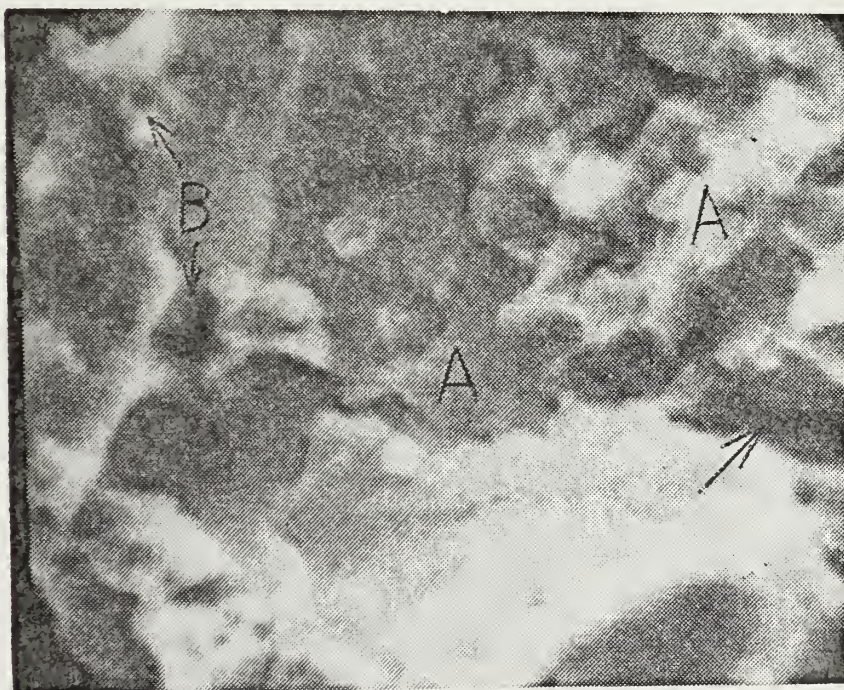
The area outlined by rectangle in fractograph Fig. 59, shown at higher magnification; brittle cleavage facets (marked A), deep secondary cracks (at arrow) and dimples (marked B) are evident. X5000.
